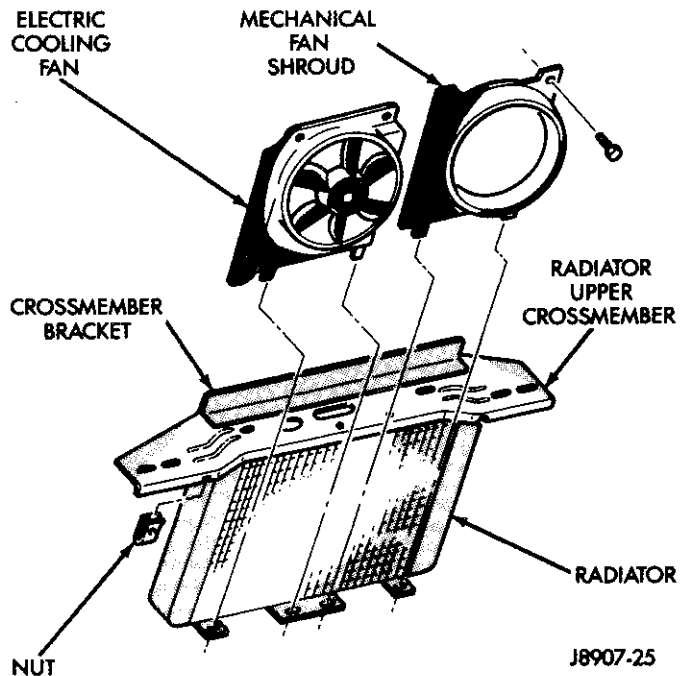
Auxiliary Fan, Mechanical Fan Shroud Remove/Install
